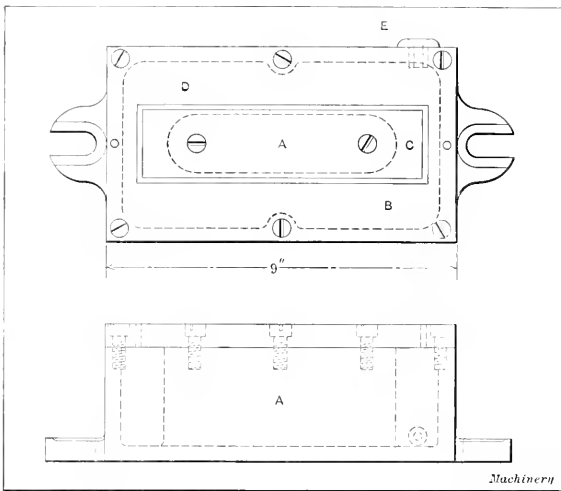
Three-piece Gray Iron Chuck for grinding, planing or milling Work
